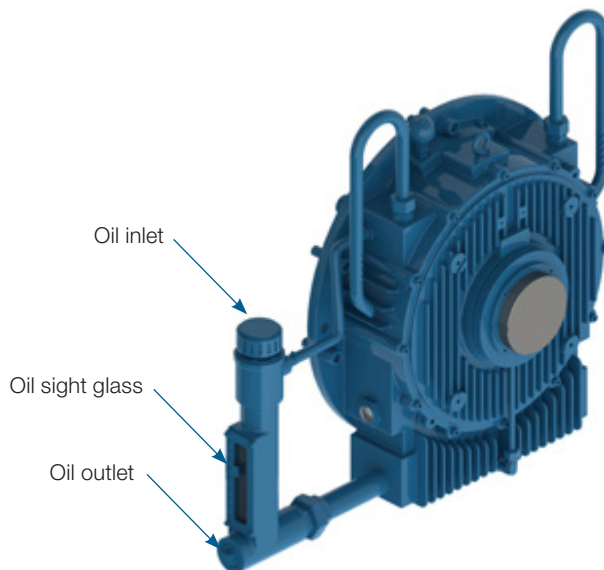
Oil lubricated bearing - horizontal mounting
